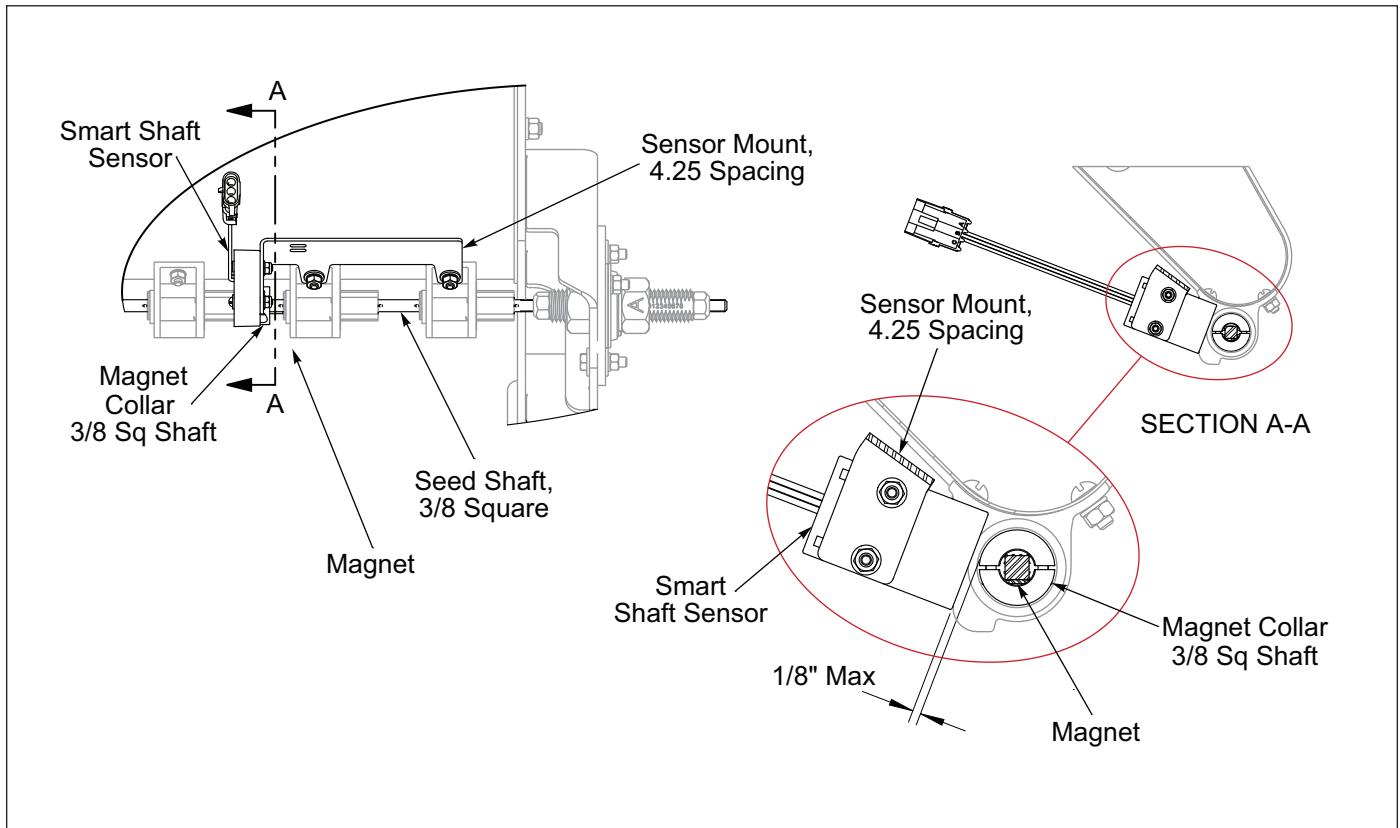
Brillion Elite Mini Monitor - Rear Small Meter Seed Box Seed Shaft Sensor
